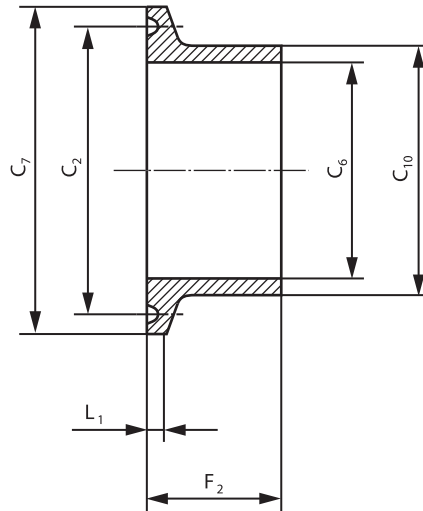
Sectional drawing of a clamp fitting acc. to ISO 2852 - DO
